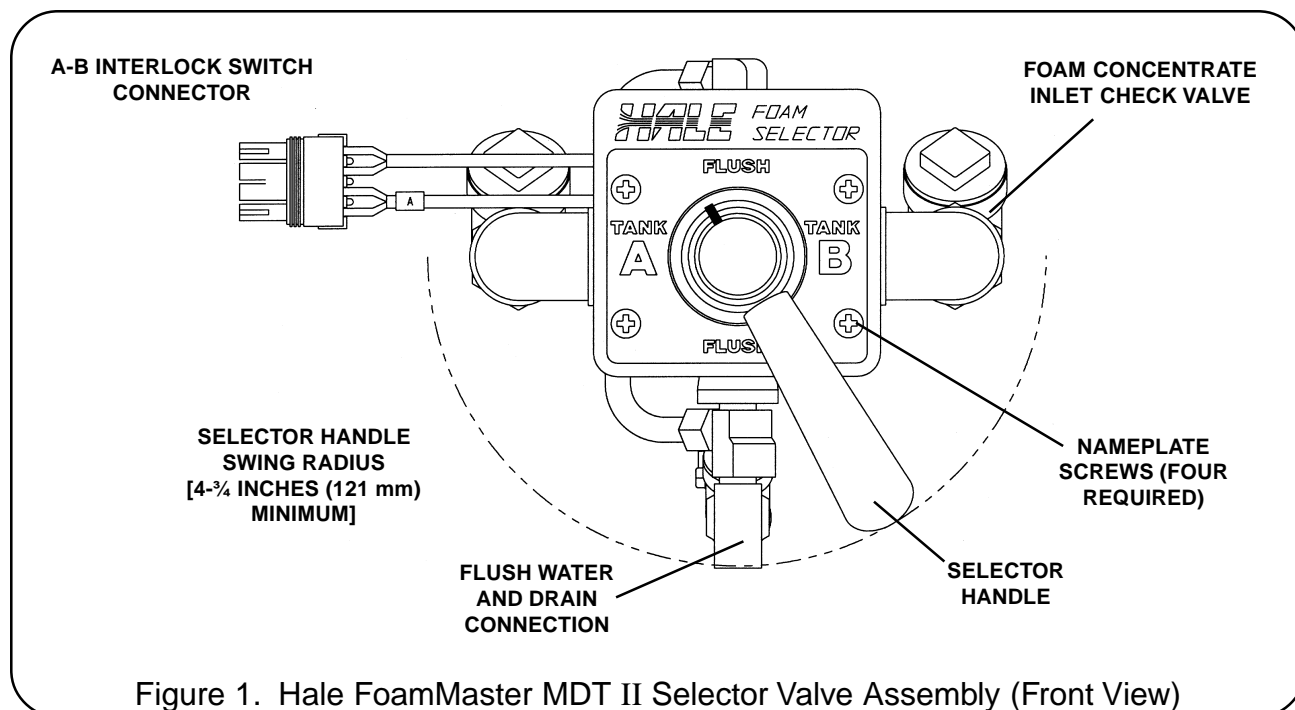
Hale FoamMaster MDT II Selector Valve Assembly (Front View)
